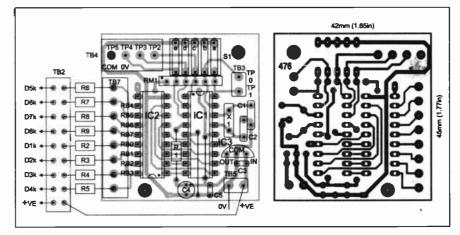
Component layout, wiring details and the full-size underside copper foil master pattern for the Main Control printed circuit board.
